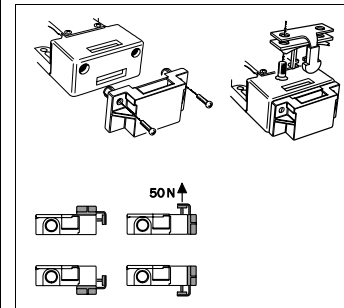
Mounting the catch and retainer kit IE16-SCR, only in conjunction with actuator IE16-S1
